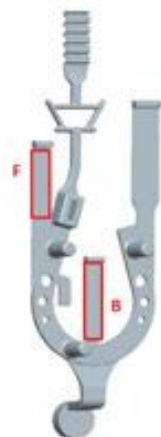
Horse-shoe Reference Casting and the two appendixes for bending test.
